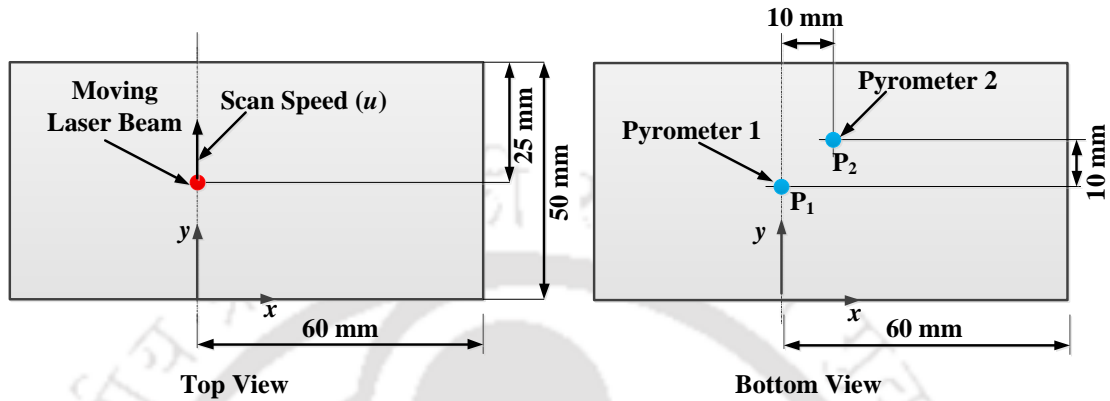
Top and bottom view of the workpiece showing the laser beam path and location of pyrometers
